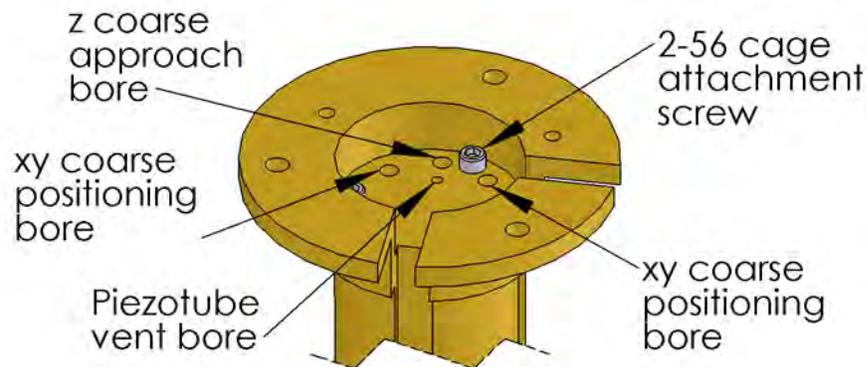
Isometric projection of the bottom of the cage base showing the two xy coarse positioning and the z coarse approach bores. Also visible are 2-56 screws attaching the cage to the cage base and a bore that vents a screw holding the piezotube assembly to the cage base.
